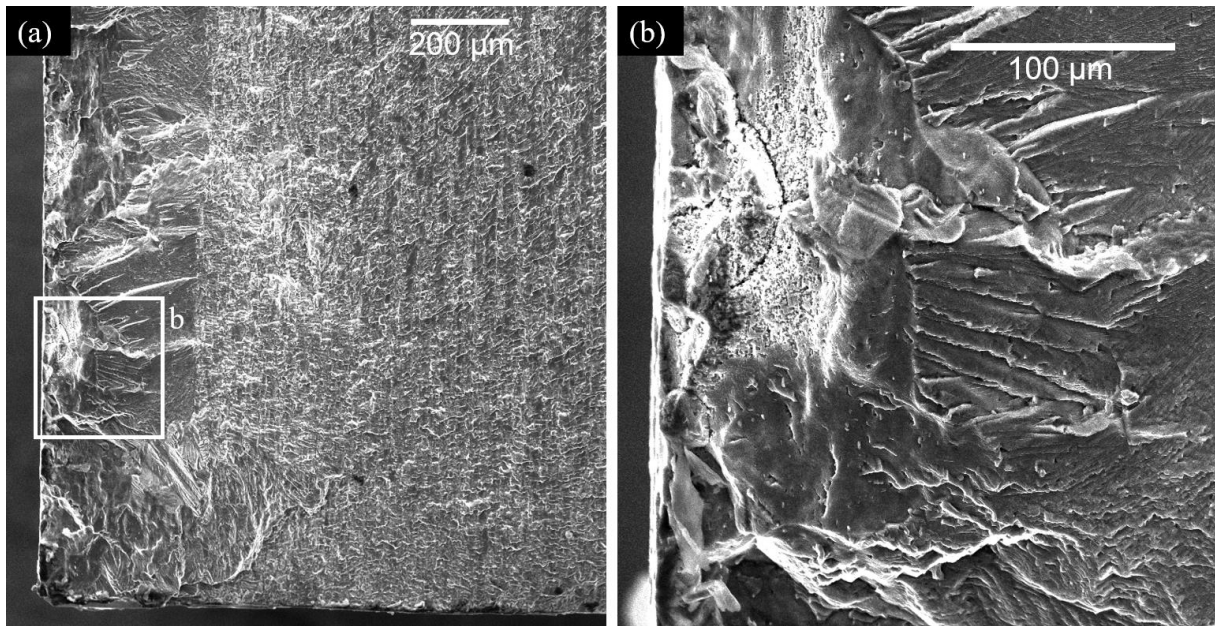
Fracture surface of as extruded specimen with 1 h pre-corrosion.
